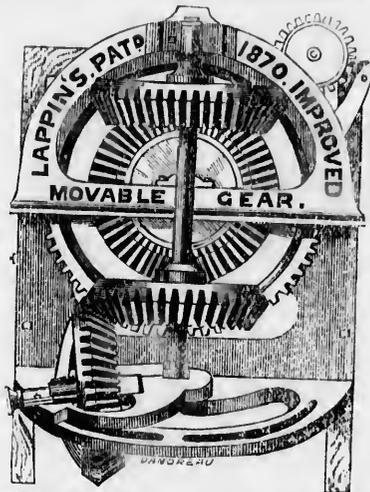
LAPPIN'S PATENT MOVABLE GEAR FOR THRESHING MACHINES.
